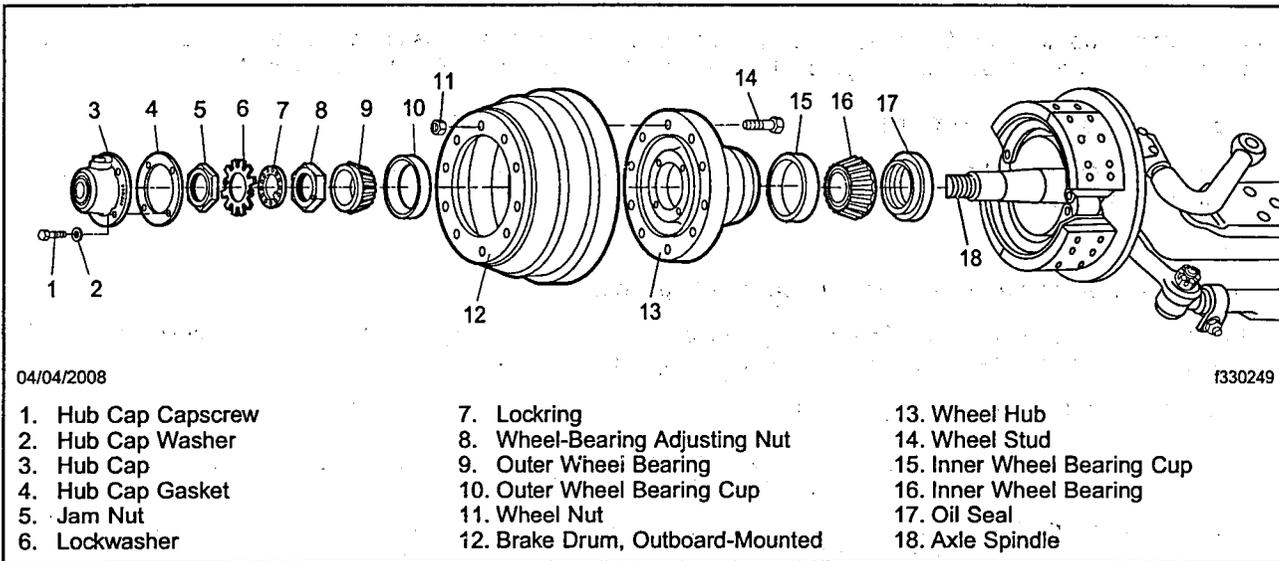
, Front Axle Assembly, Drum Brakes (New Spindle Nut Set Shown)
